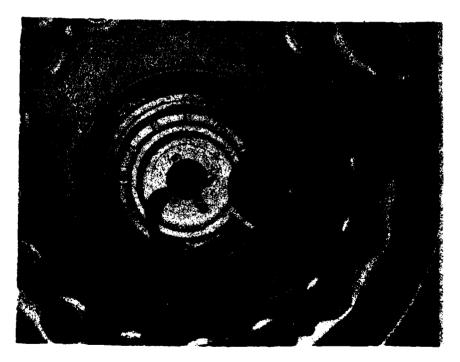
STEP 9 = INSTALL MODIFIED ANTISKID TRANSDUCER ADAPTER
